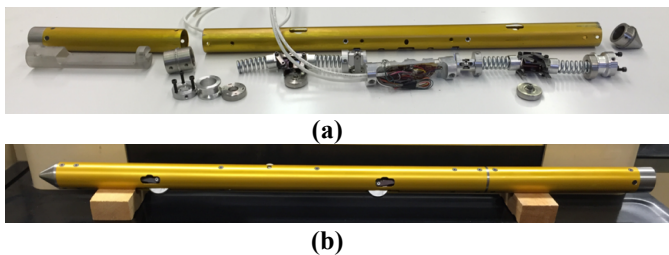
RSBP (a) before, and (b) after the final assembly.
